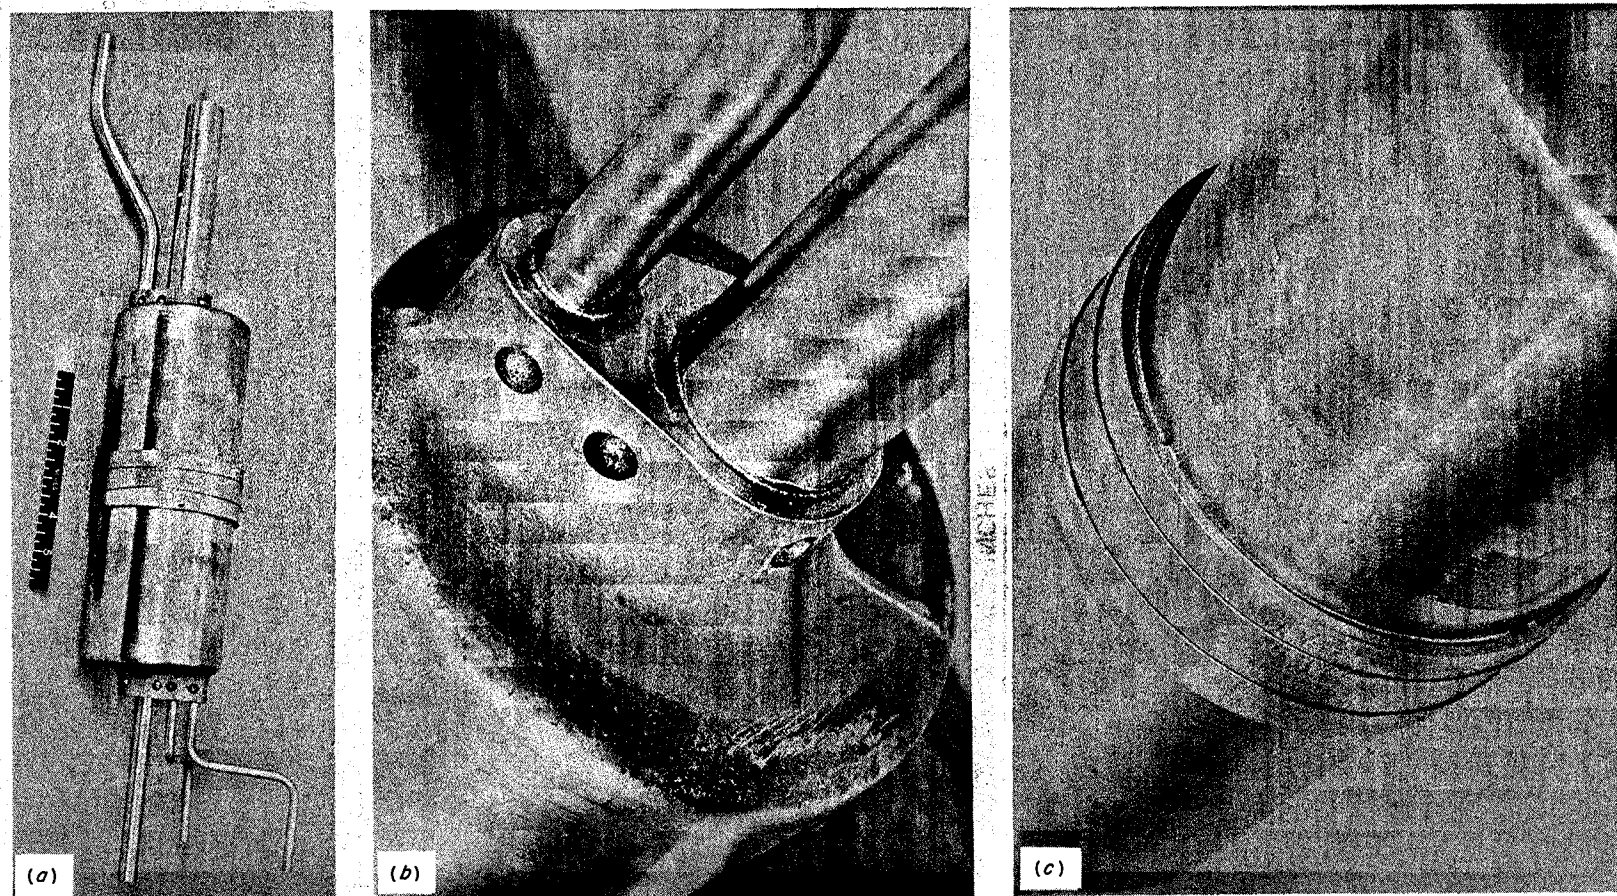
Mockup of molybdenum upper disengaging section. (a) Overall, (b) end view of tube-to-boss braze, and (c) side view of sleeve brazed over girth weld.
